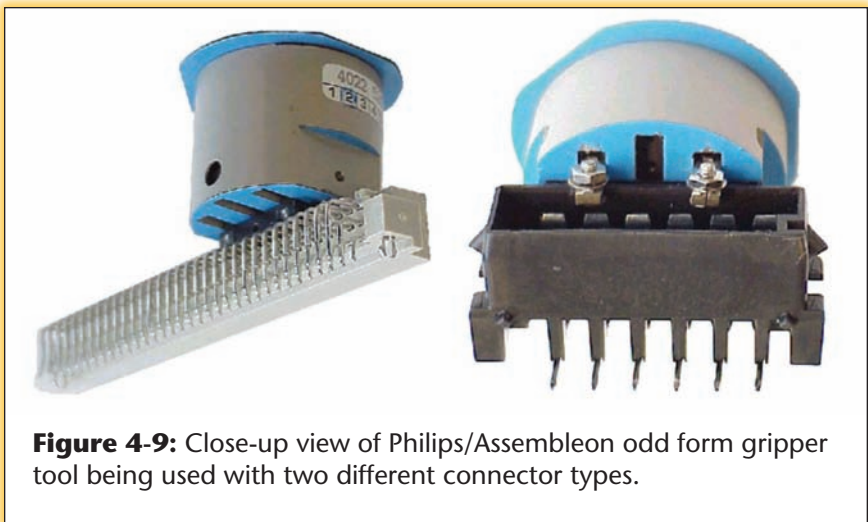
Close-up view of Philips/Assembleon odd form gripper tool being used with two different connector types.
